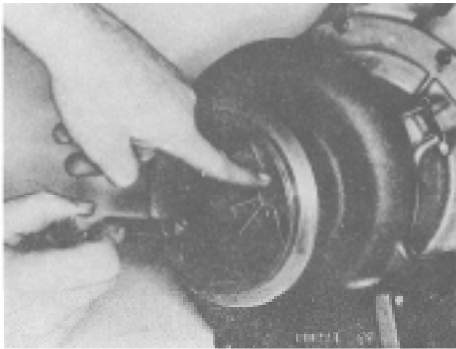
, T-5,44. Checking radial clearance on turbine end
